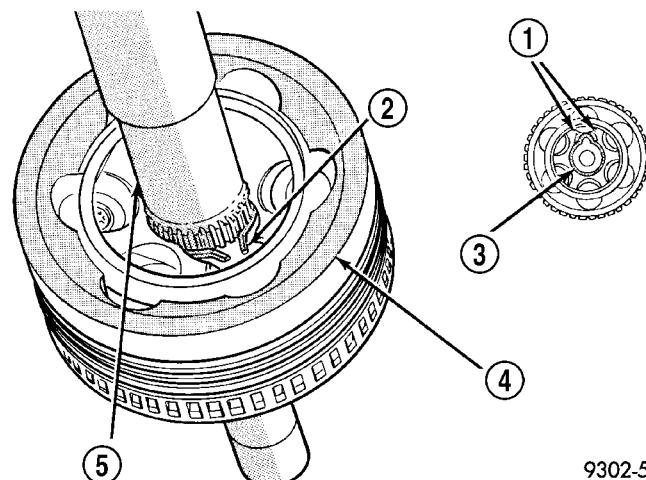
Outer C/V Joint Removal From Interconnecting Shaft
